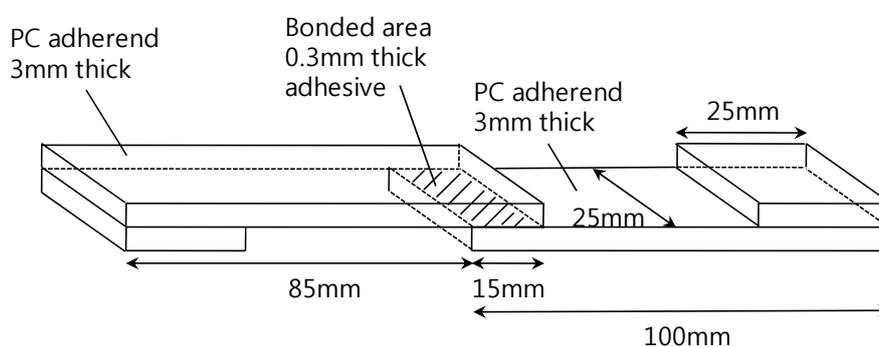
Design and dimensions of the specimen for single-lap shear test.
